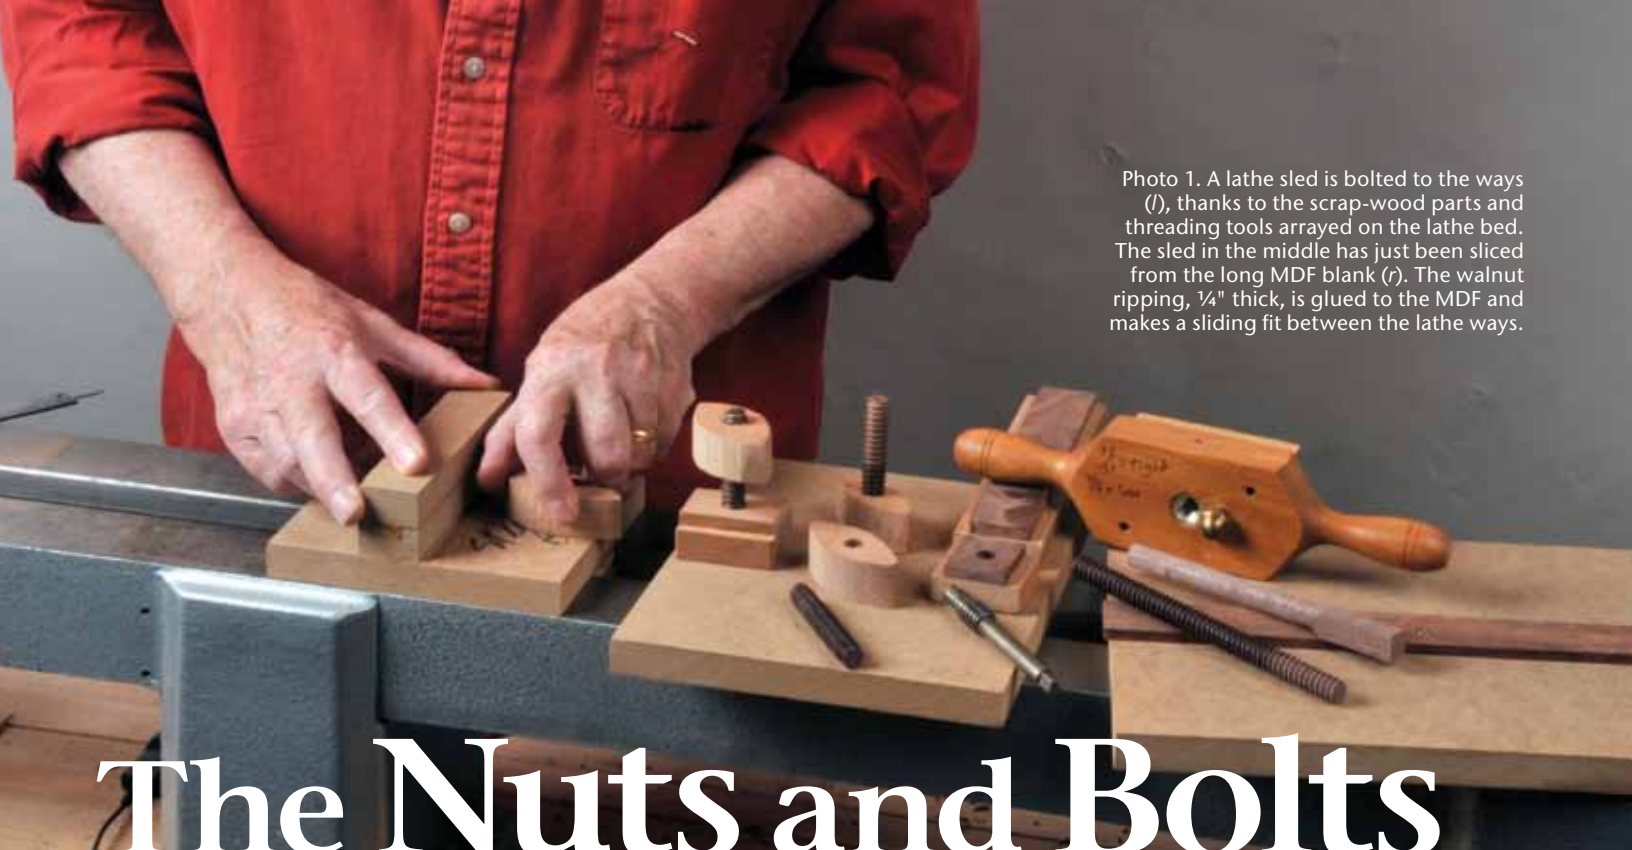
A lathe sled is bolted to the ways (l), thanks to the scrap-wood parts and threading tools arrayed on the lathe bed. The sled in the middle has just been sliced from the long MDF blank (r). The walnut ripping, 1/4" thick, is glued to the MDF and makes a sliding fit between the lathe ways.
